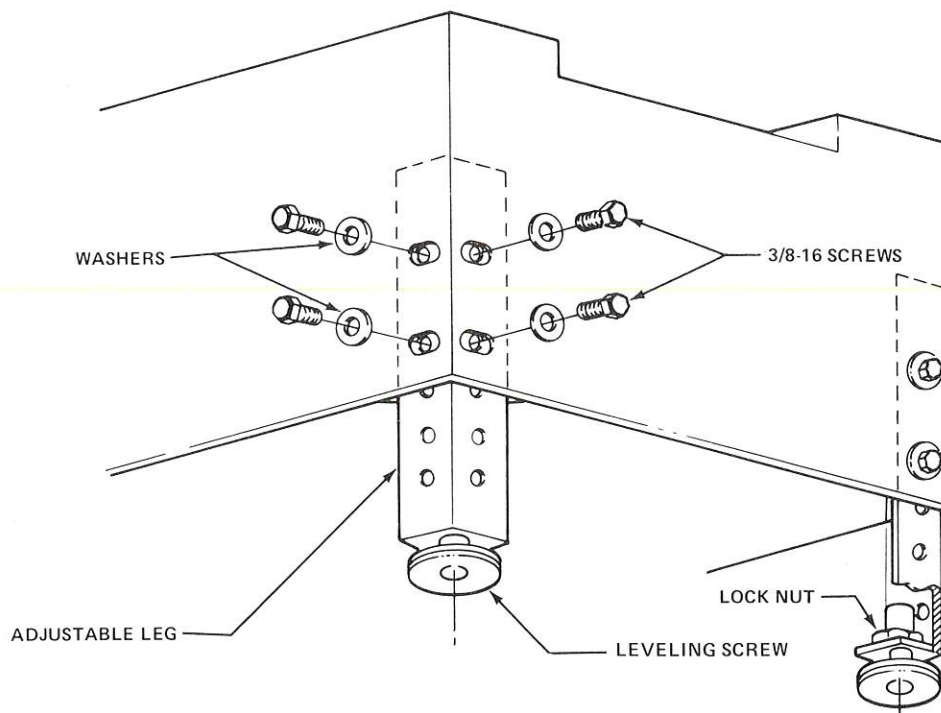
MACHINE CONVEYOR BED HEIGHT
